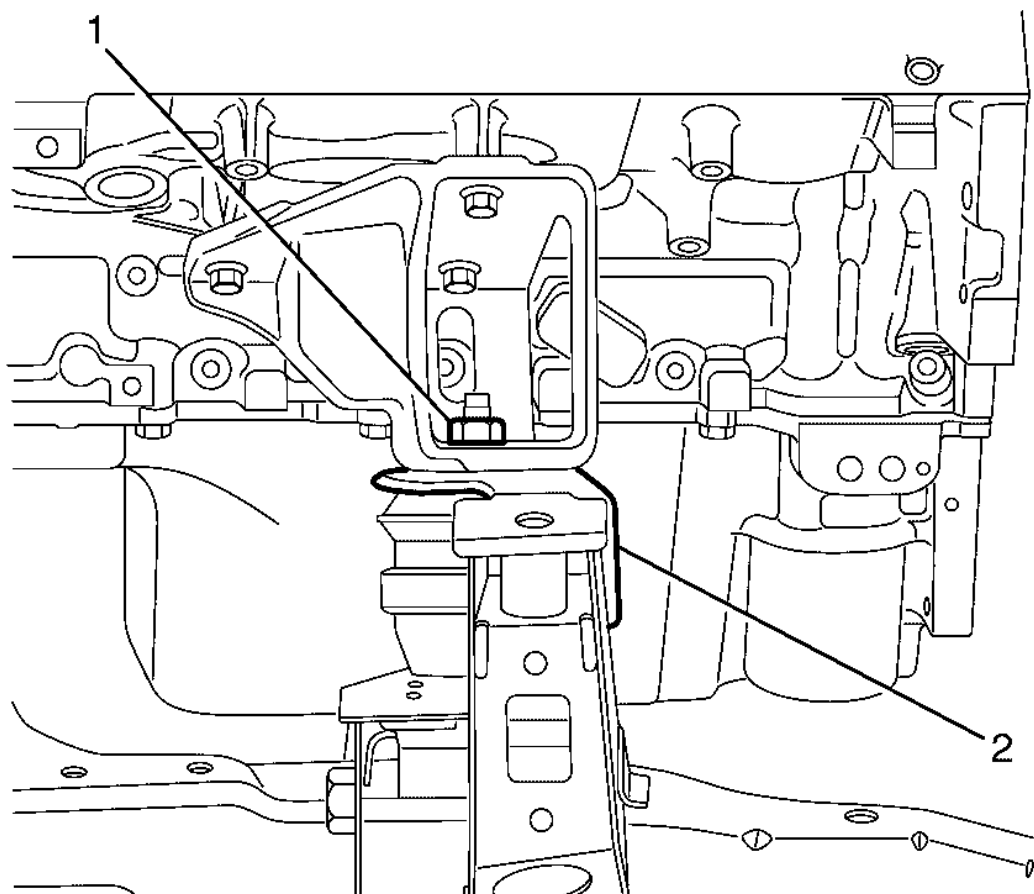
Identifying Left Side Engine Mount To Engine Mount Bracket Retaining Nut
